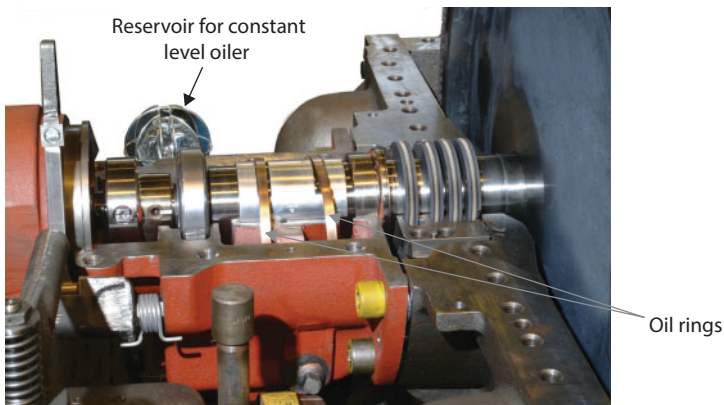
Location of lube oil rings on top of bearing; bronze or brass material typically. (Courtesy of Elliott Group)
